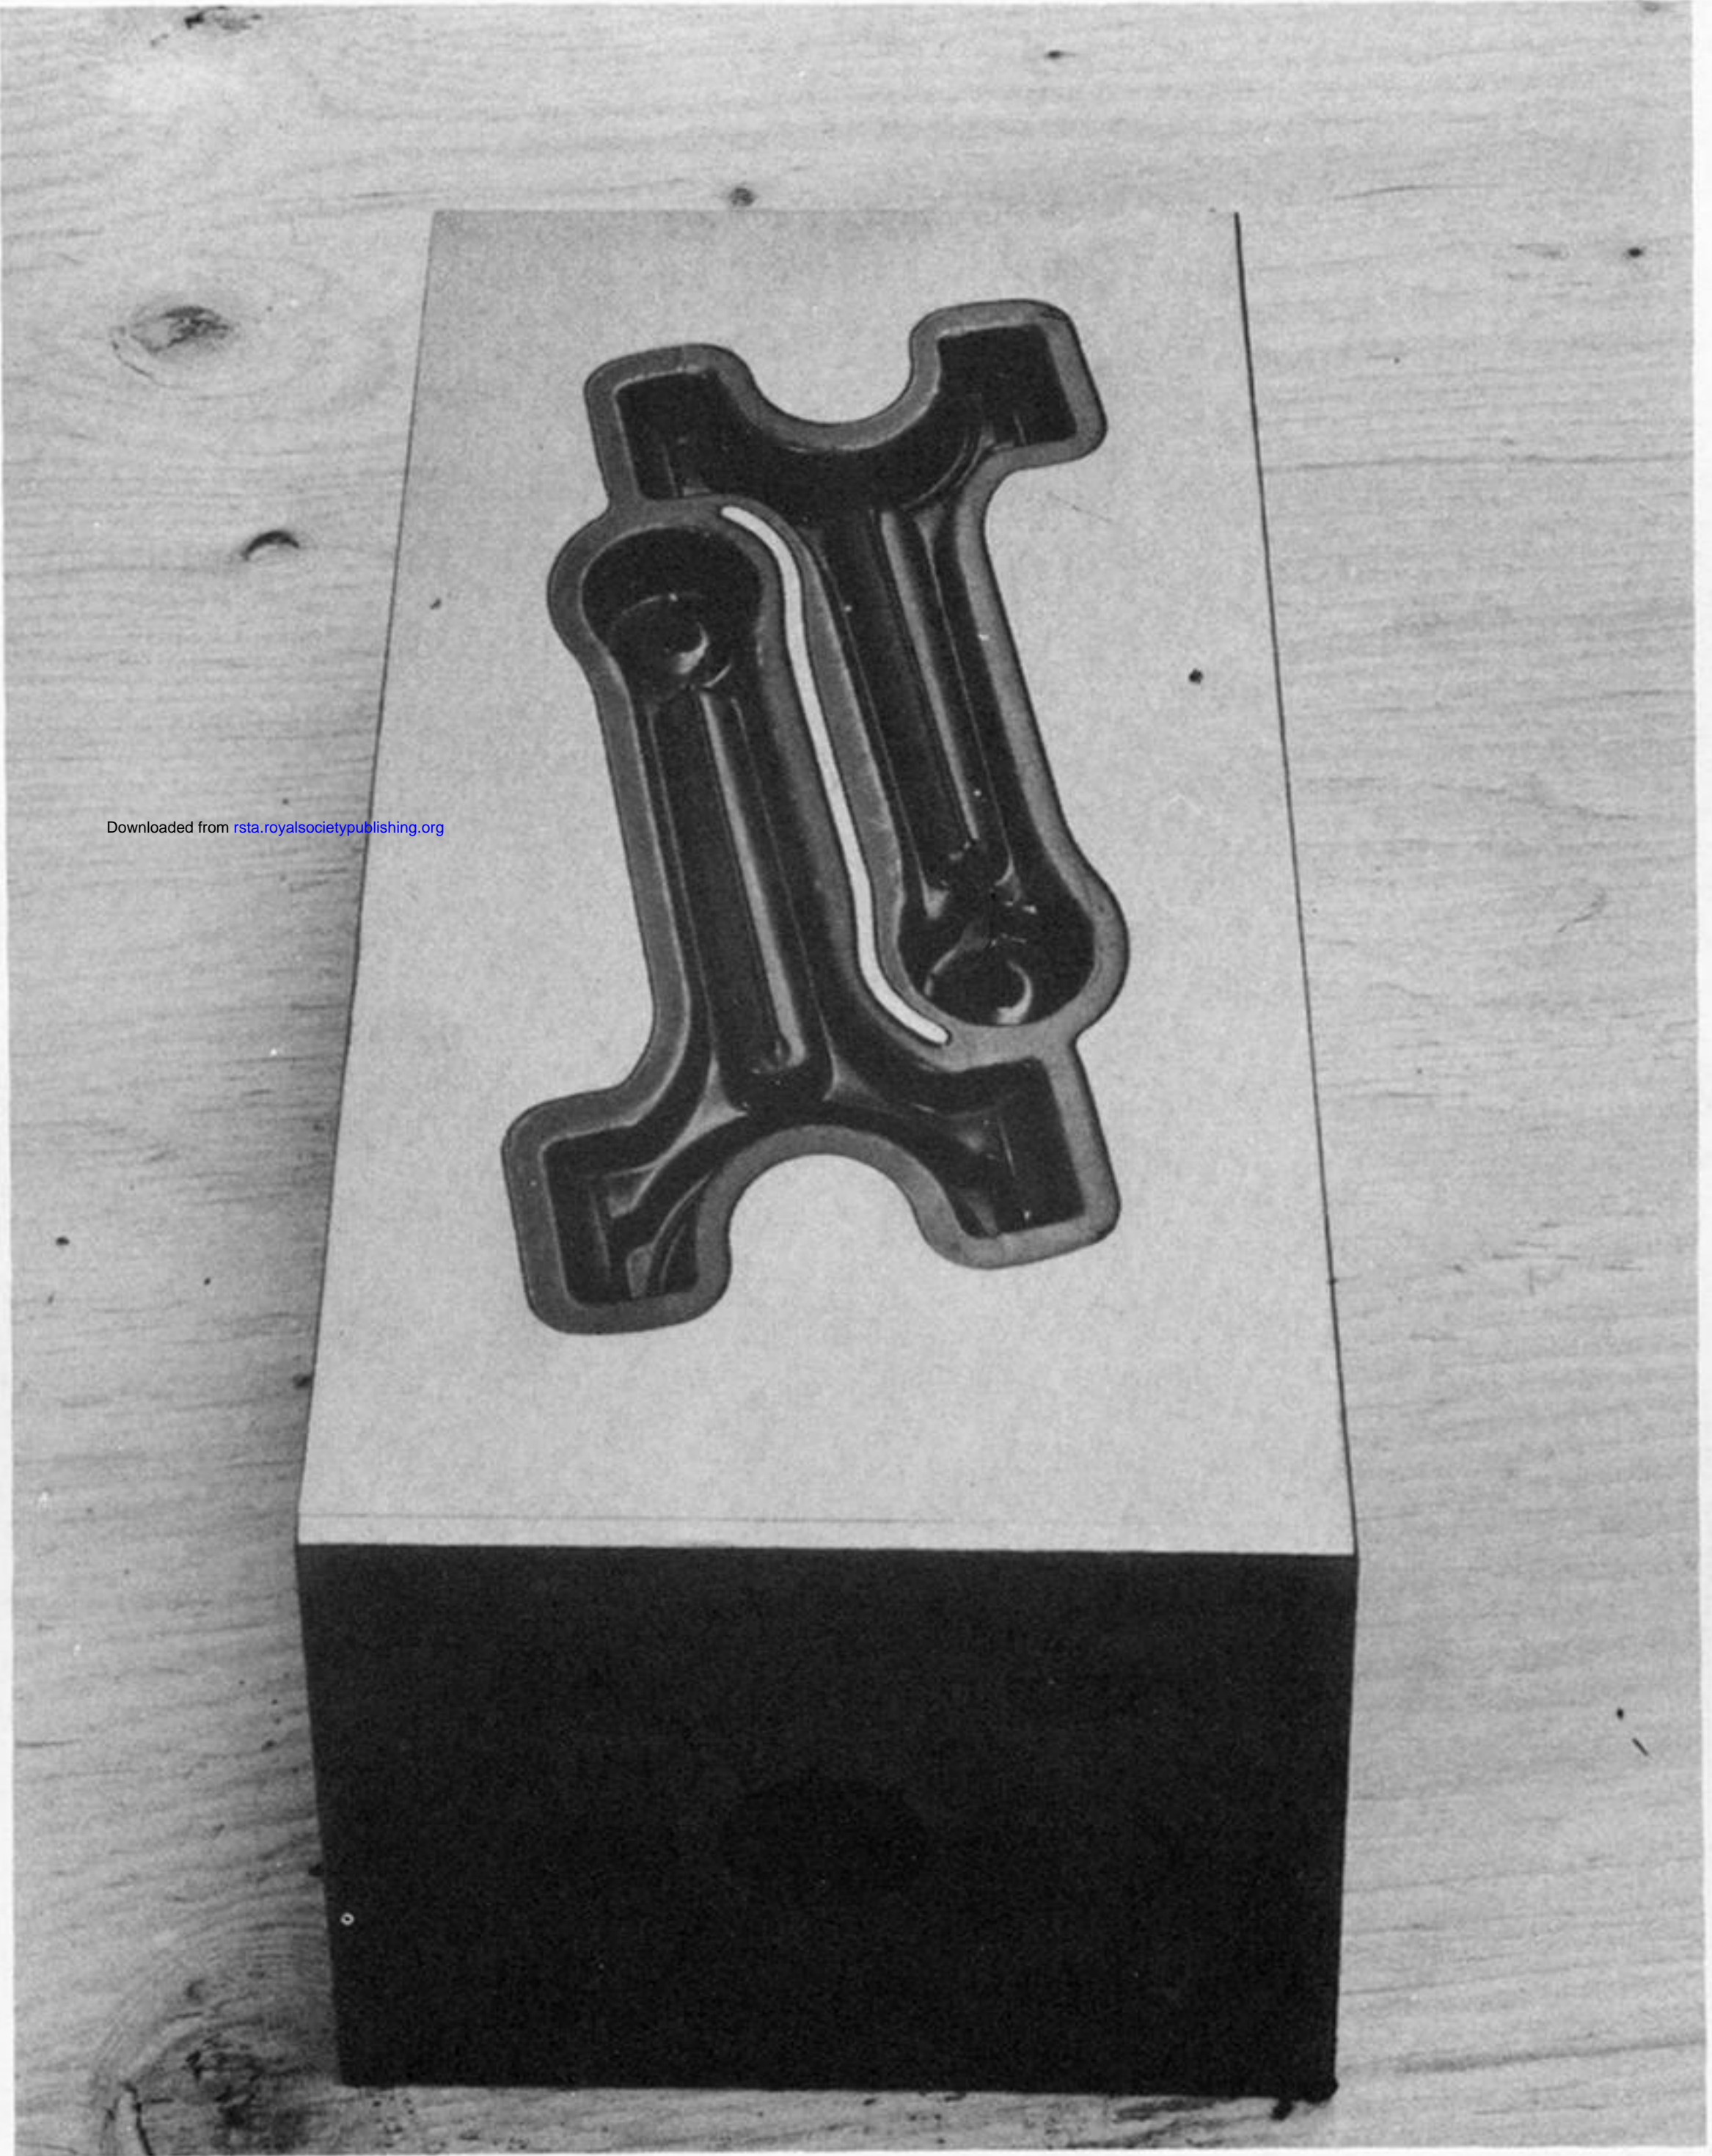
Die sinking press work, manufactured by e.c.m. (Courtesy Matchless Machines Ltd).
